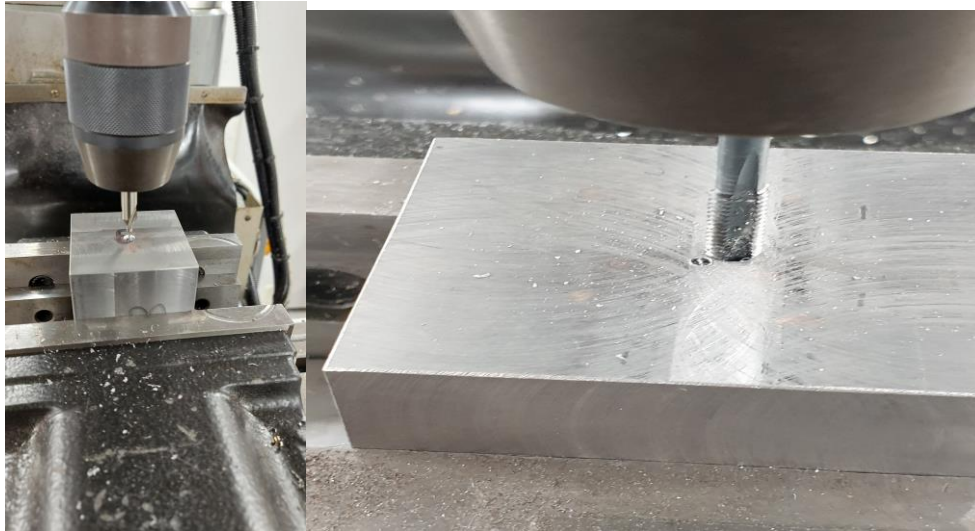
showing a fault. When machining this face a false cut was made and stopped in time. The part was then machined to the correct size.
